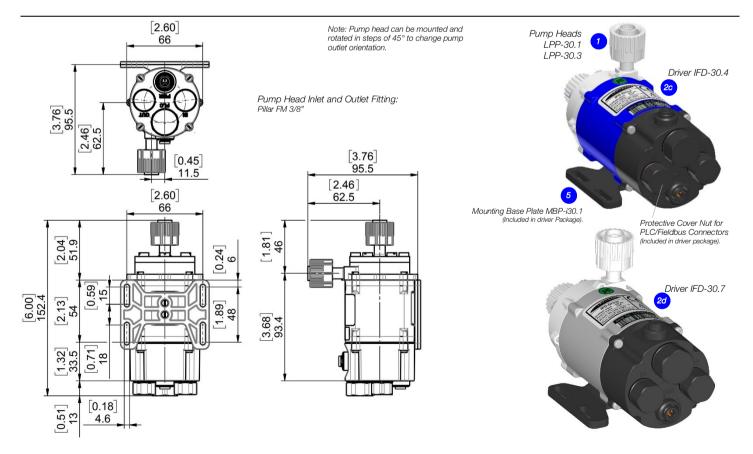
Basic dimensions and description of standard "EasyConnect" model Note 1: Dimensions without tolerance are for reference only.
